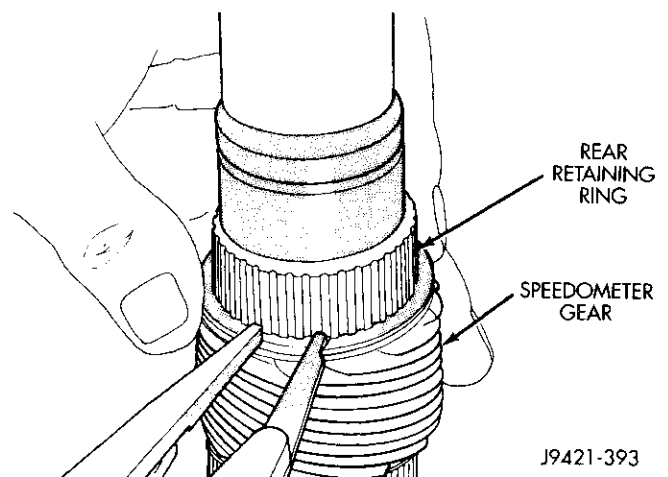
Speedometer Gear Rear Snap Ring Removal
